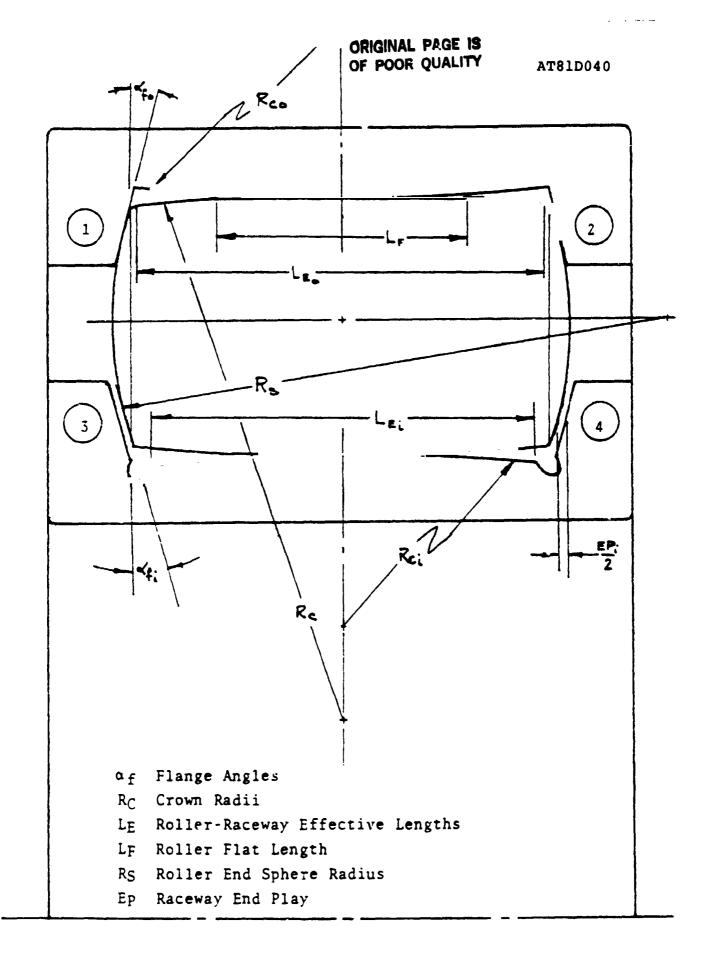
CYLINDRICAL ROLLER BEARING GEOMETRY
